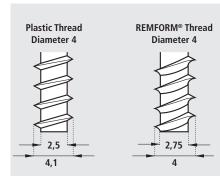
The leading flank improves material flow to the pressure flank, resulting in greater material contact and therefore providing better resistance to stripping, vibration loosening and pull-out.
